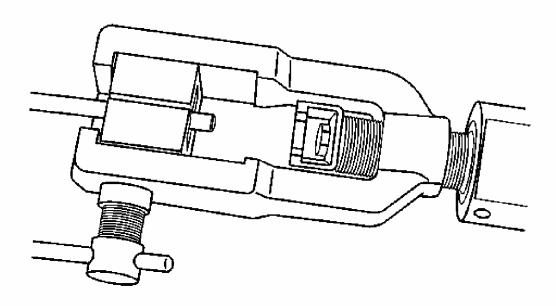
Installing Die Halves Into Die Cage Courtesy of GENERAL MOTORS CORP.
